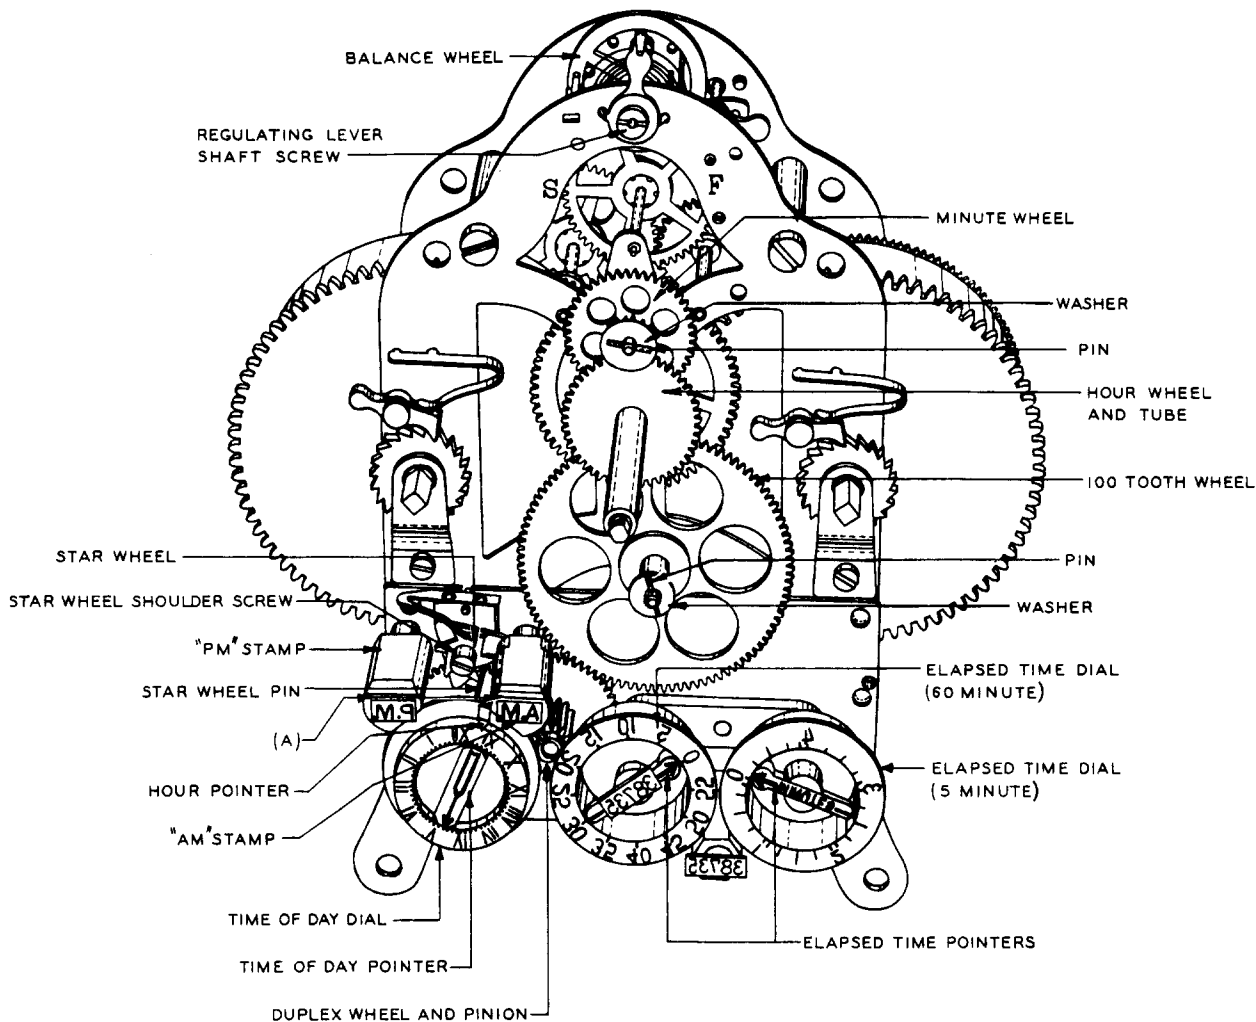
Stamping Mechanism — Model 6 Calculagraph
